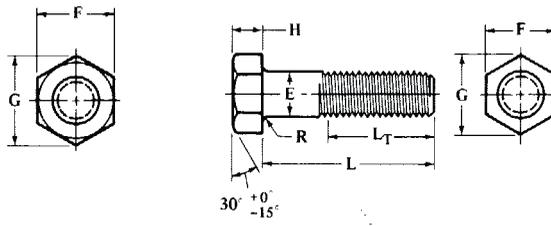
Hex Bolts, Heavy Hex Bolts (Table 3)
